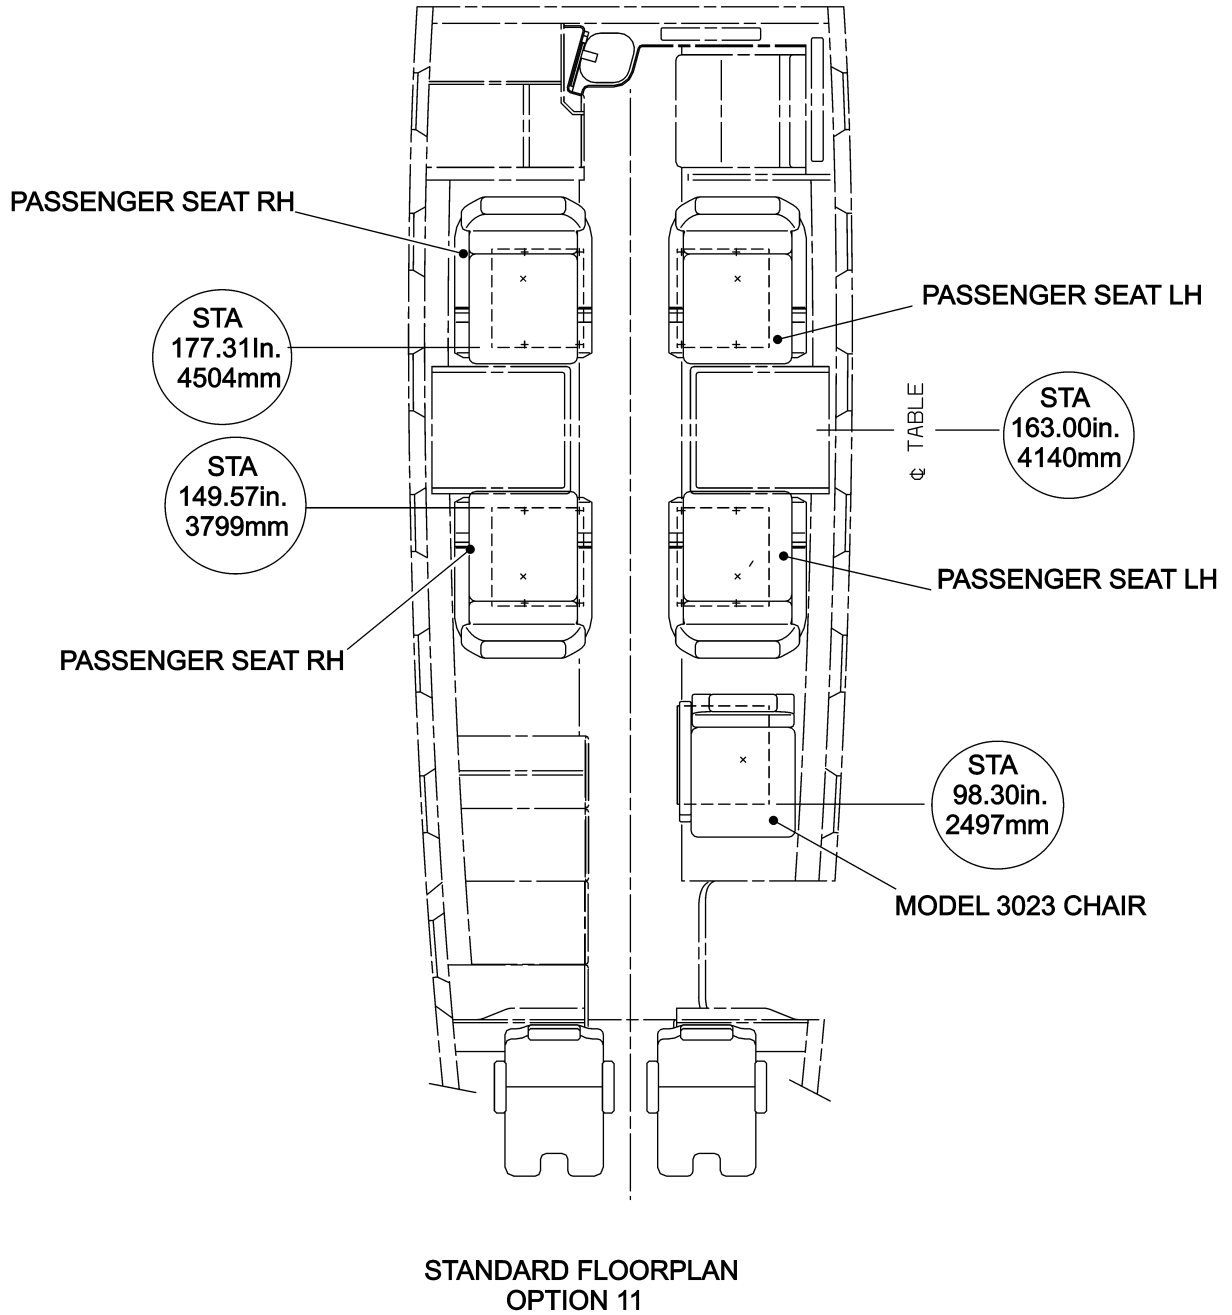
PASSENGER SEATING Sheet (4 of 12)
